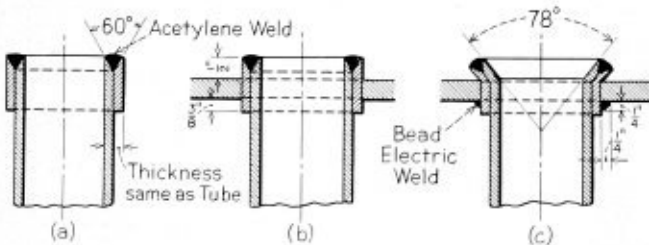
Welding of arch tubes to firebox sheet and nipples
